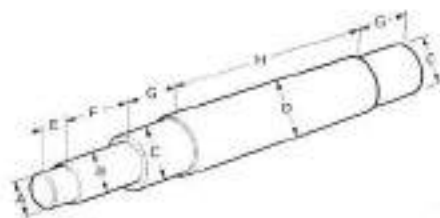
When installing clutch in Models 1210 and 1212 equipped with Laycock clutch, use a pilot made to the dimensions shown in legend.
